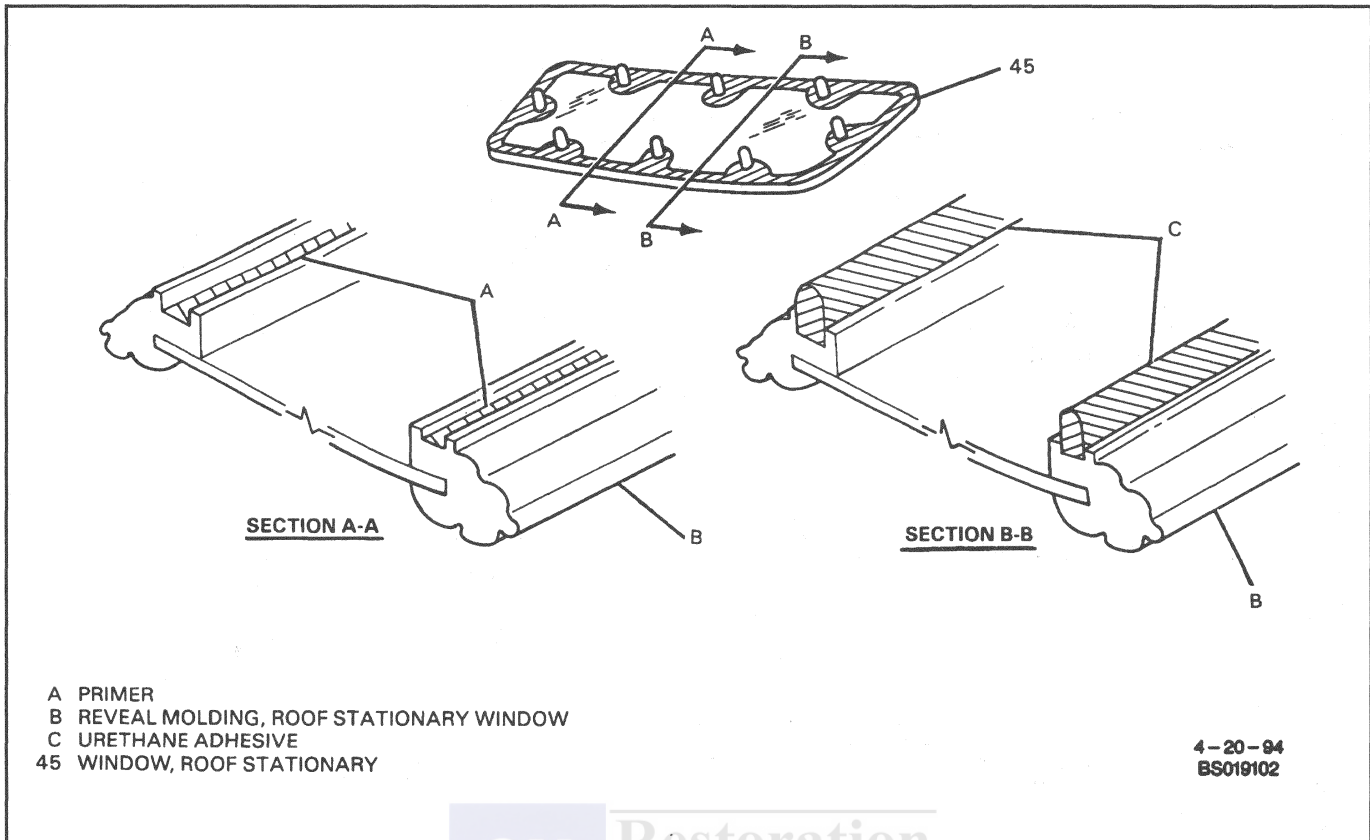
Applying Primer and Adhesive to Roof Stationary Window-(Buick Wagon)
